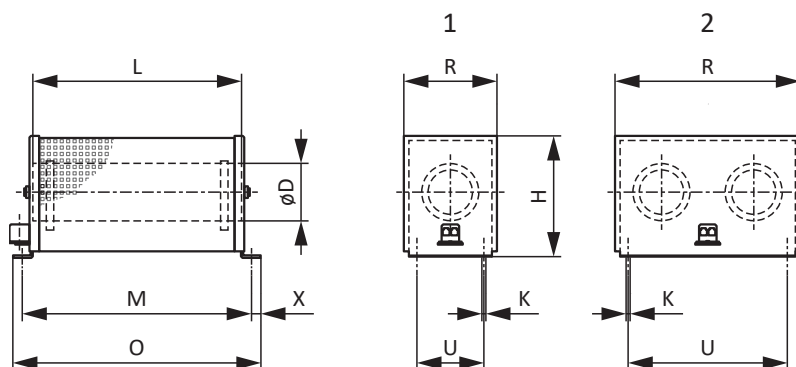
FZMU (1), FZZMU (2) dimensional drawing
